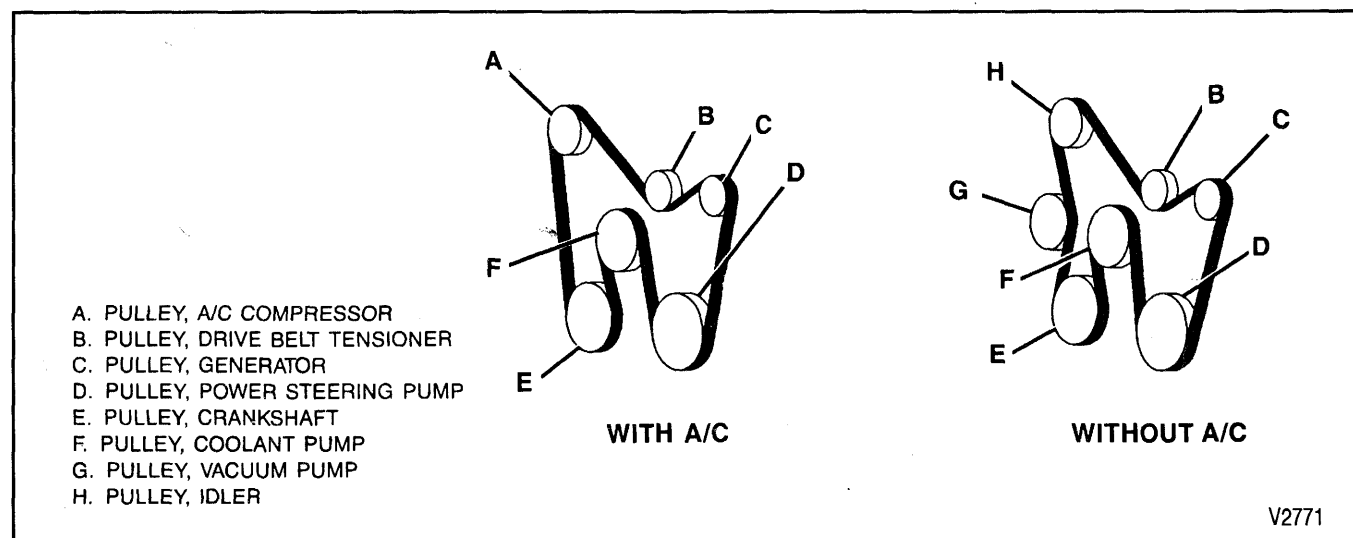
Multiple Rib Drive Belt Routing (Diesel Engines)
